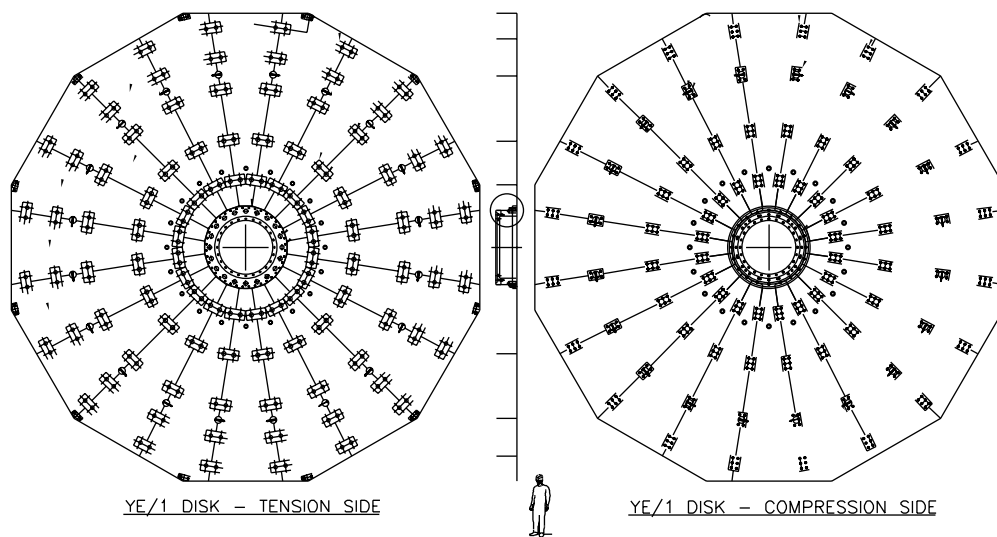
Typical disk construction from 20 pie-shaped sectors.
